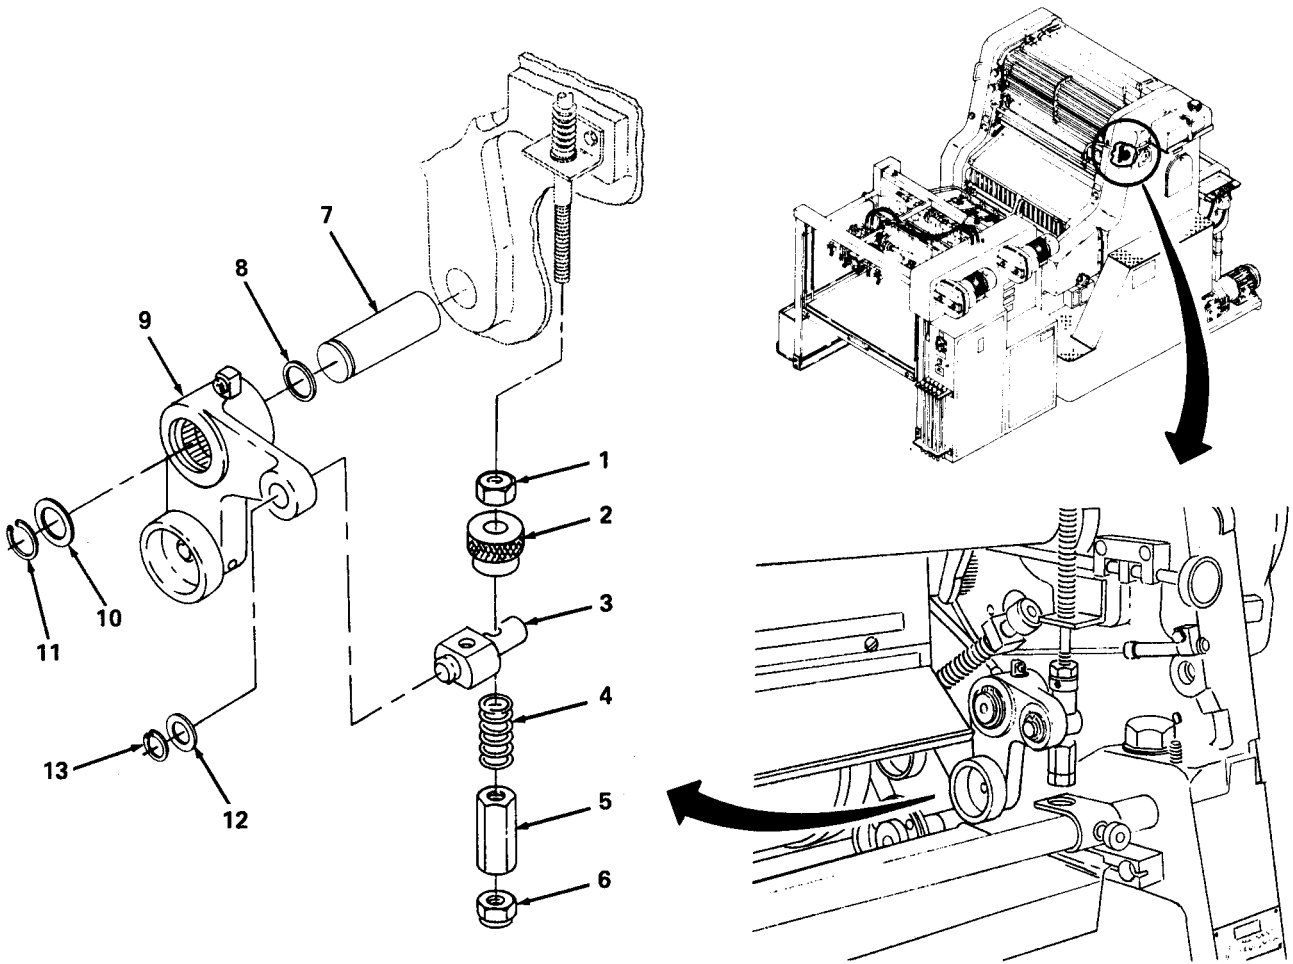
Vibrator Roller and Bearing Assembly Installation (O/S).
